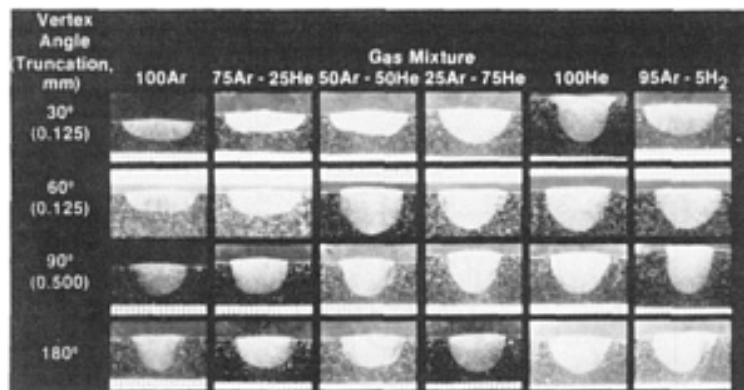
EFFECT OF ELECTRODE TIP GEOMETRY AND SHIELDING GAS COMPOSITION ON WELD POOL SHAPE FOR SPOT-ON-PLATE WELDS. WELDING PARAMETERS: CURRENT, 150 A; DURATION, 2 S
